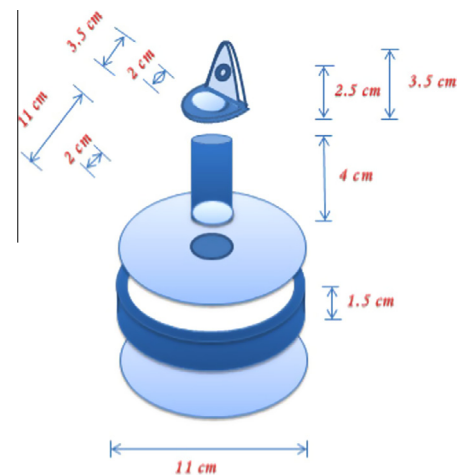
Stirling engine (Heating Cylinder dimensions) design.
